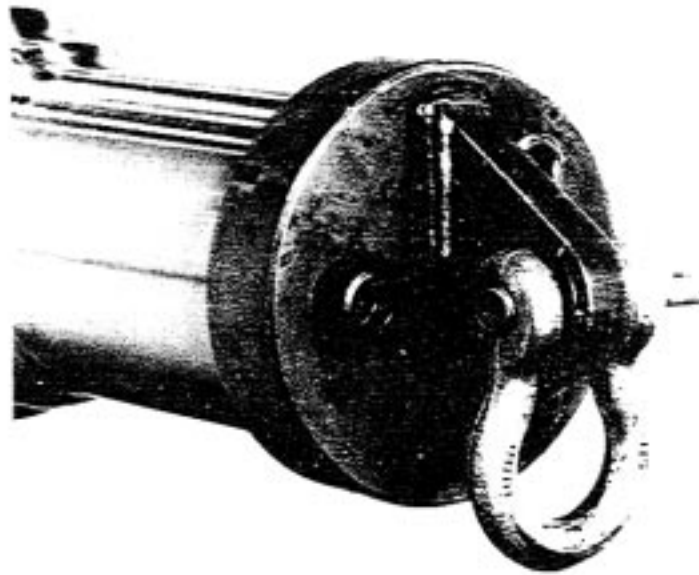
Axle/Gear Assembly on Build-up Platform in Turning Device
